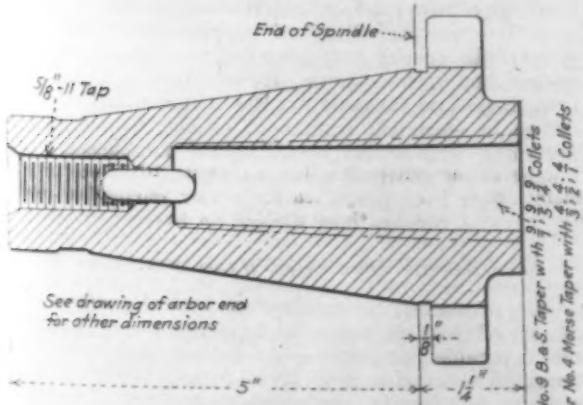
One Type of Adapter Fits Into Taper Hole of the Spindle and Is Held In With the Draw-in Bolt
